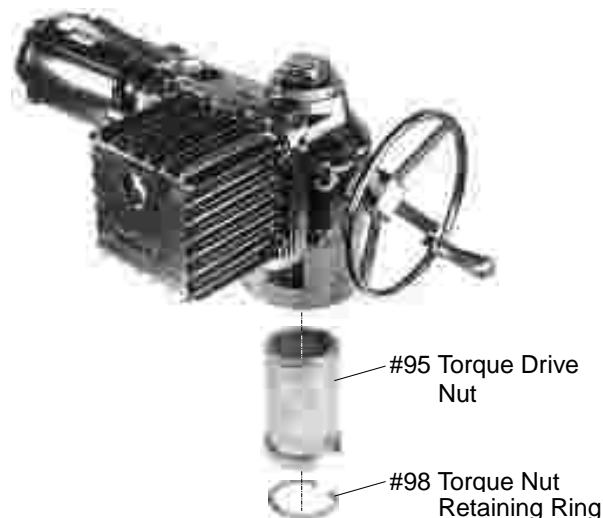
Torque Nut and Retaining Ring removal from an L120-85
